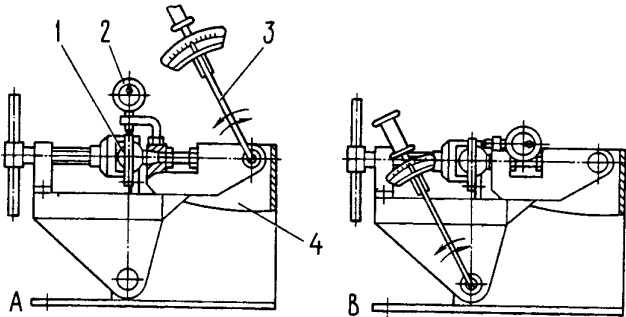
Checking Ball Joint on Gauge 02.8701.9502:
